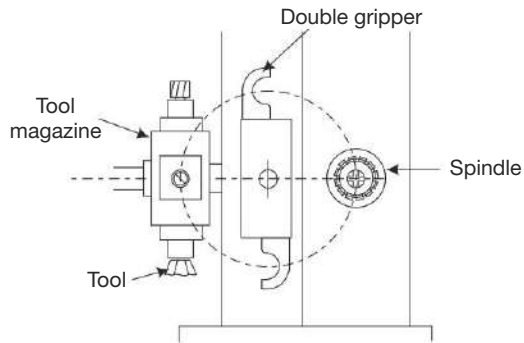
One common type of tool-change arm used for tool changing with a double gripper
